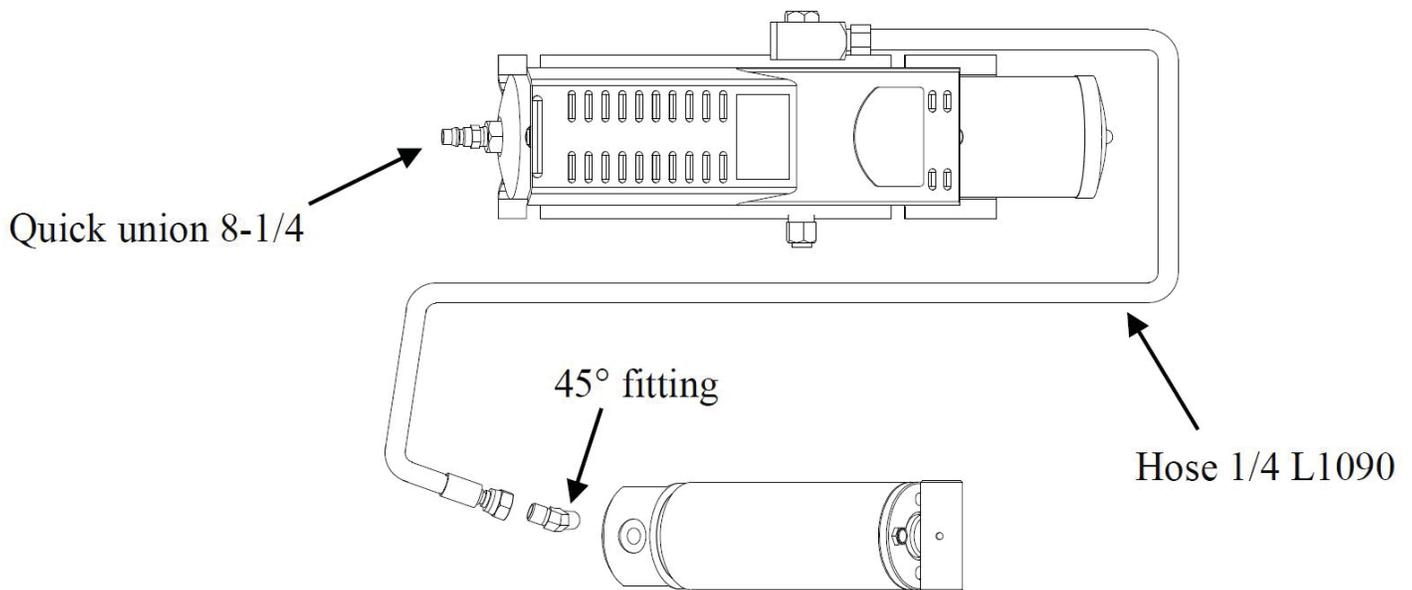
Hydraulic Line Connection Of Jacking Beam
